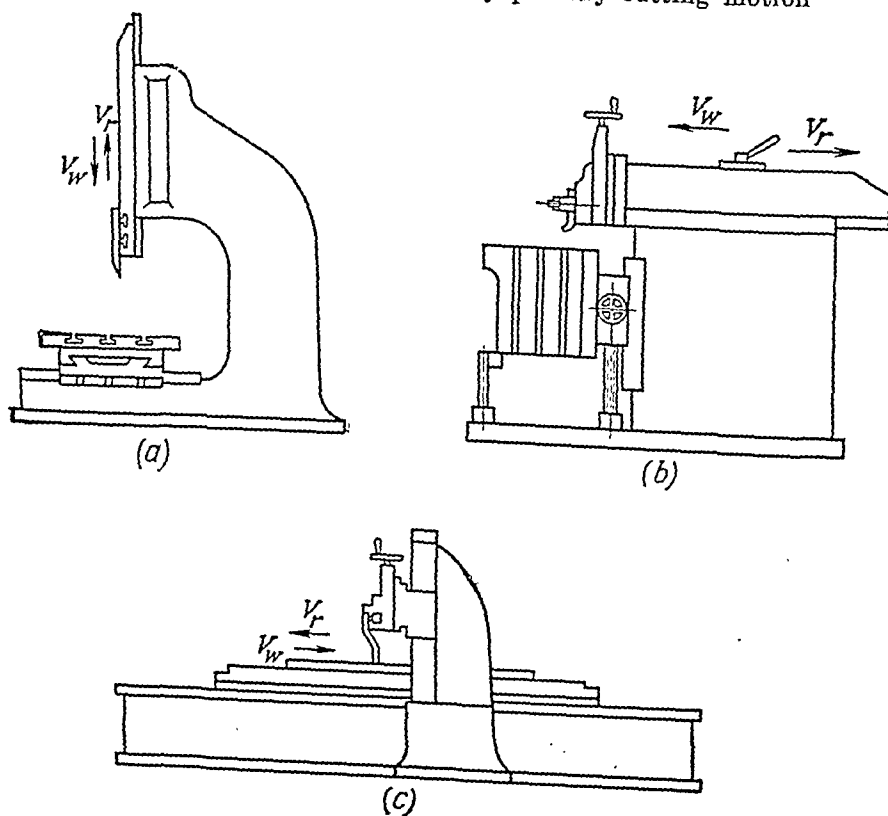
Machine tools with a straight-line reciprocating primary cutting motion
